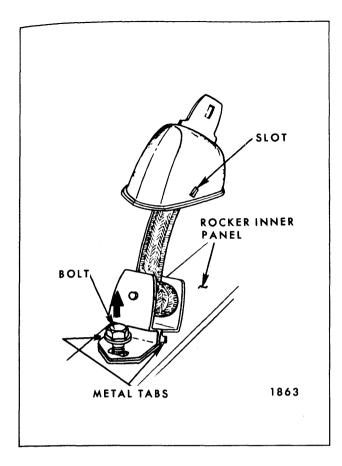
Removal of Seat Belt Retractor with Cover
